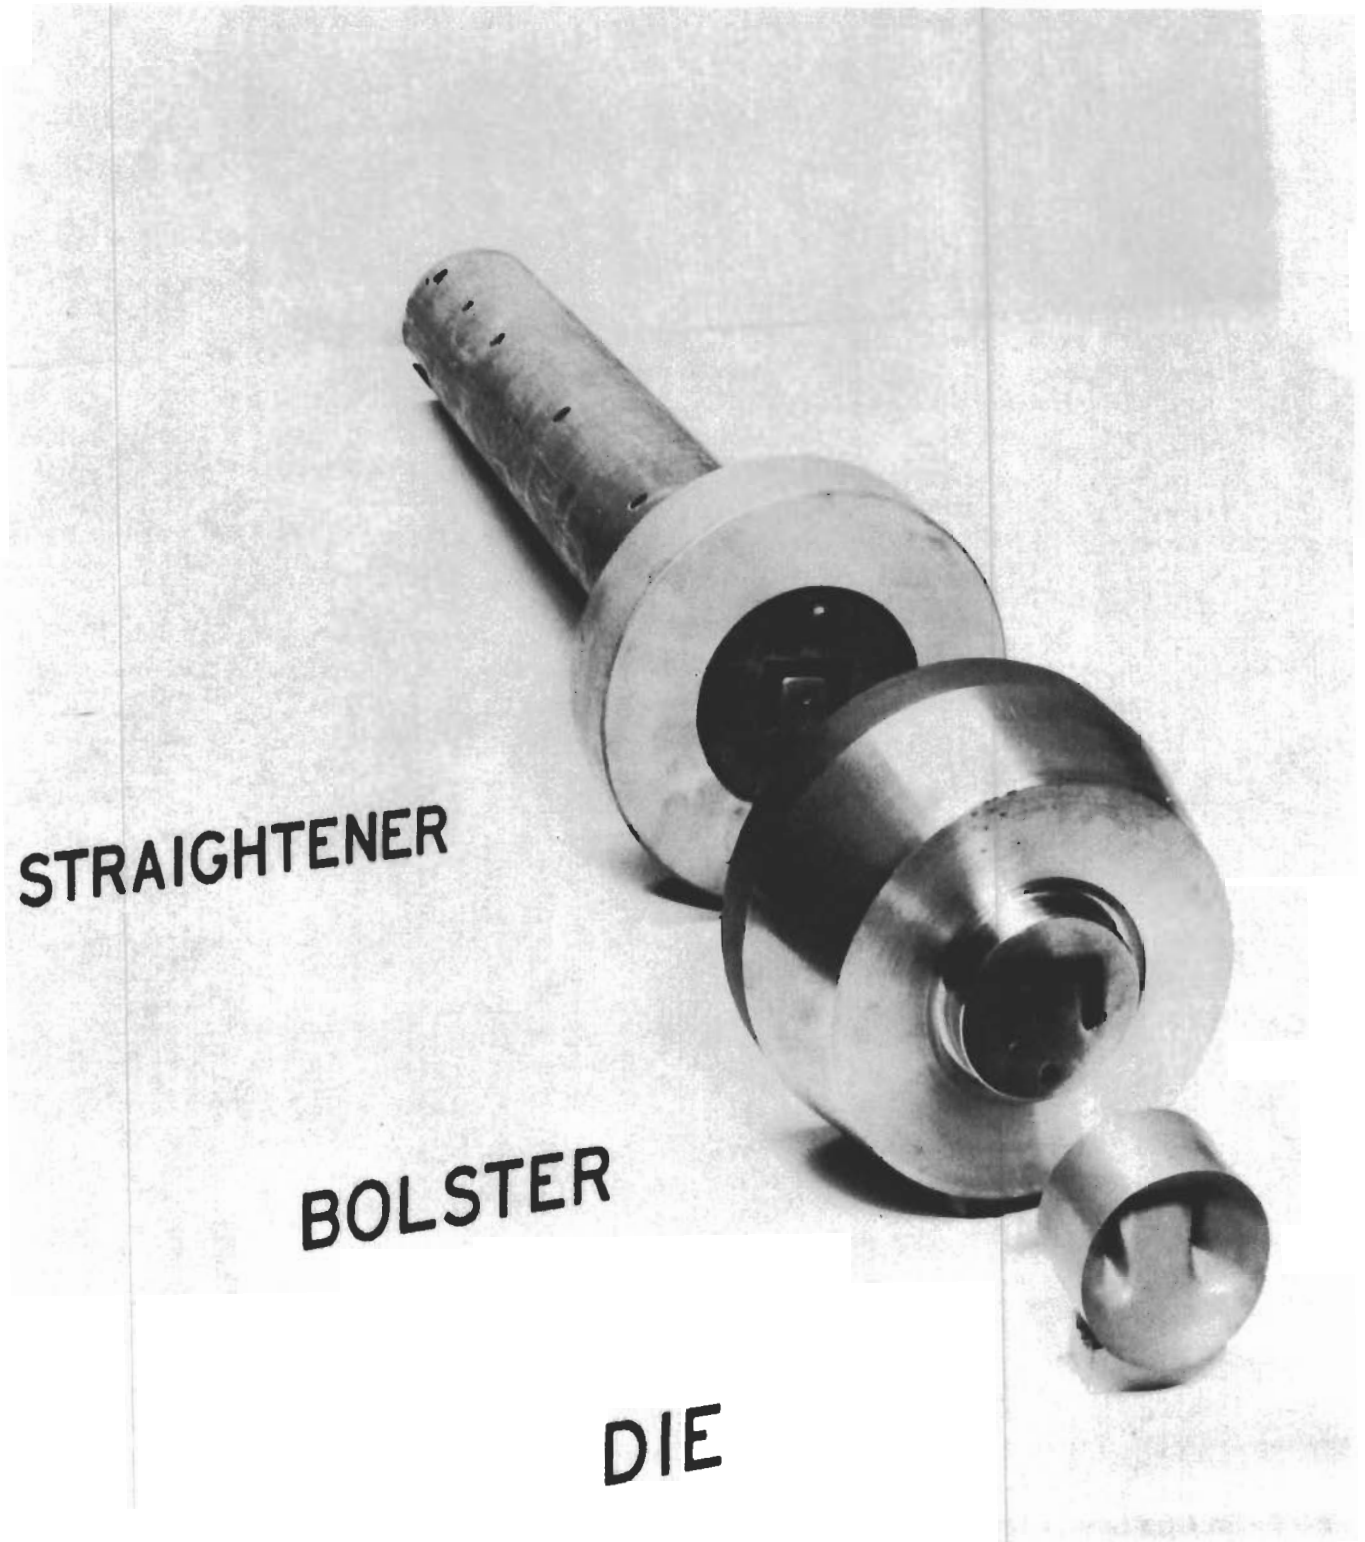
EXPLODED VIEW OF DIE, BOLSTER AND STRAIGHTENER
